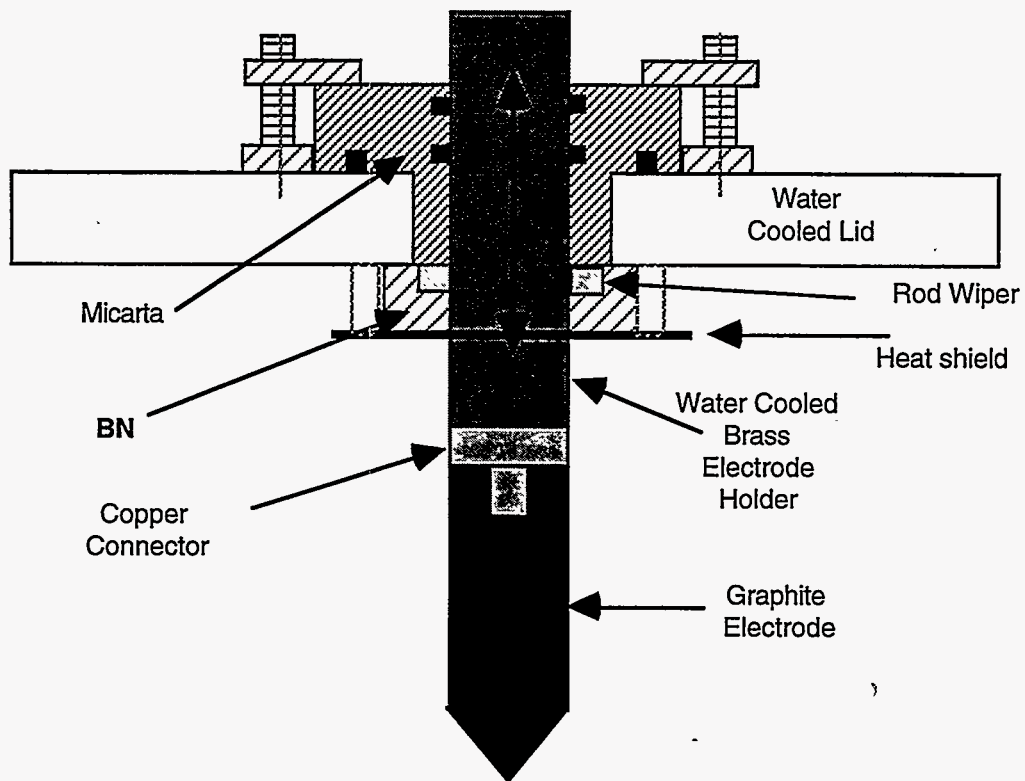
Micarta seal and rod-wiper assembly used for the electrodes during FY-94.
